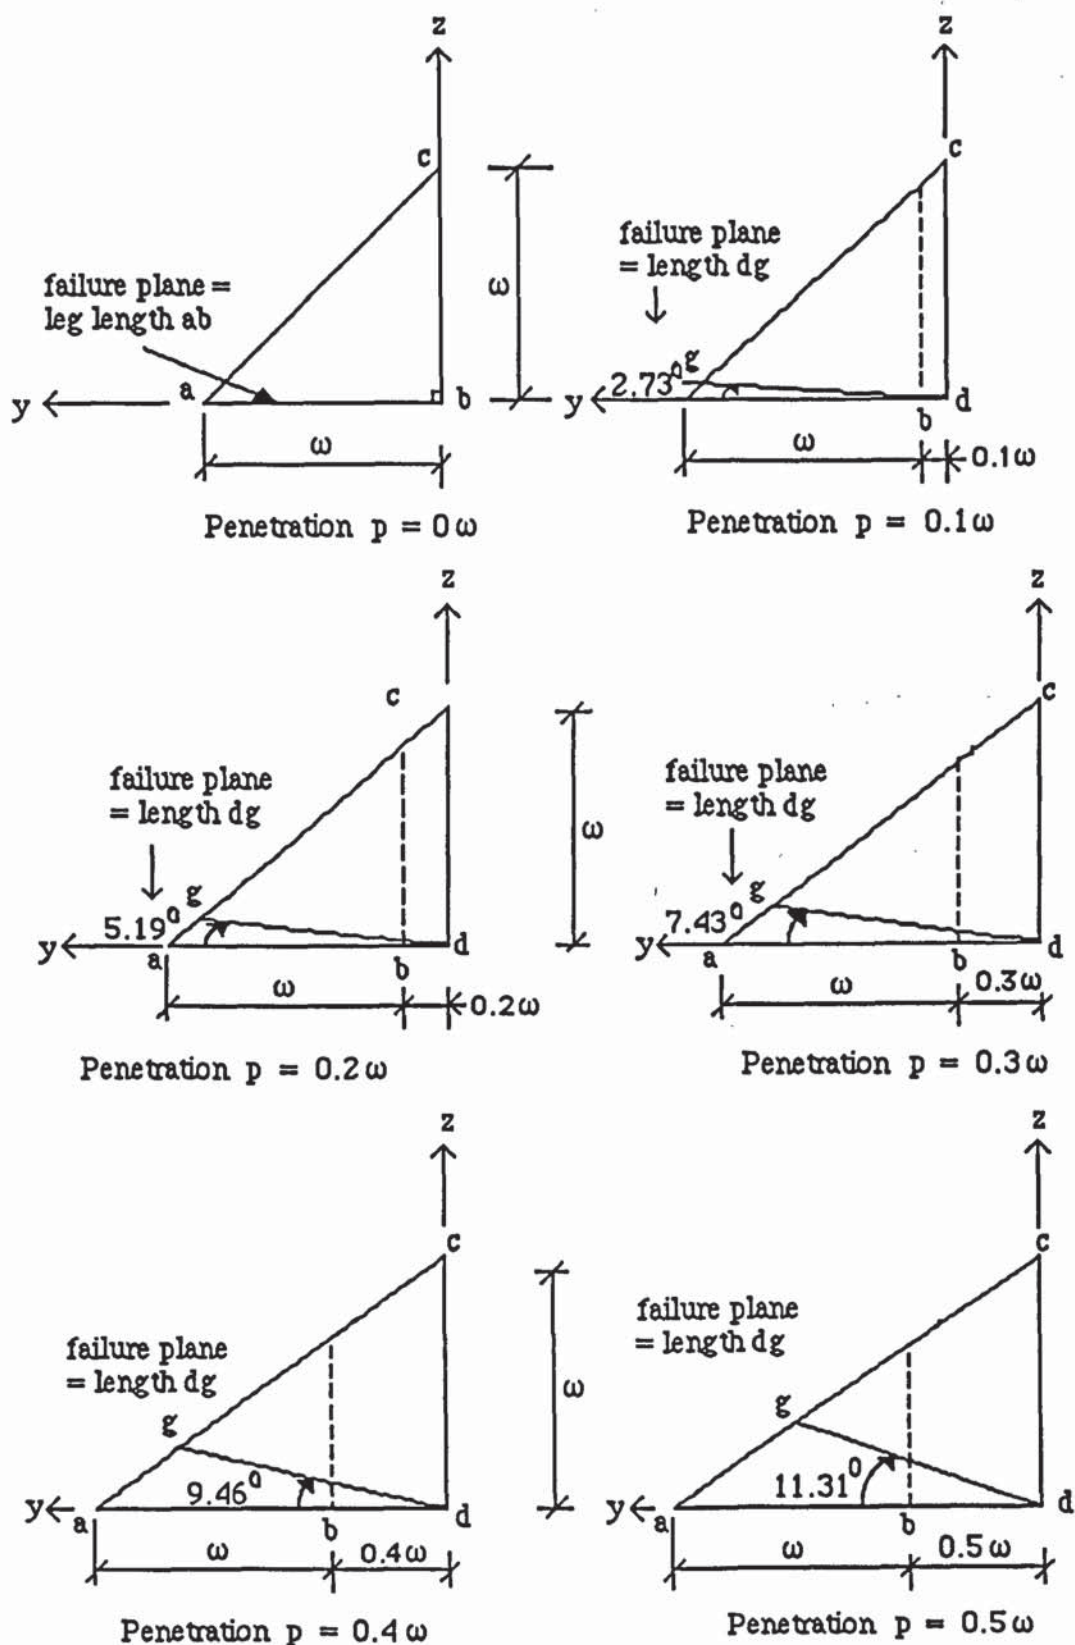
Predicted failure planes as weld penetration increases for tensile fillet welds.
